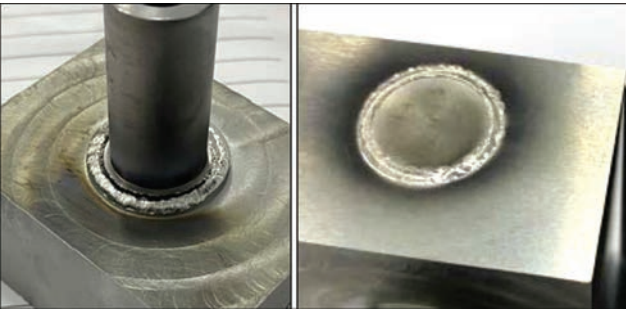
Formation of circumferential welds with edge flanging, imitating nipple-body and plug-body joints
